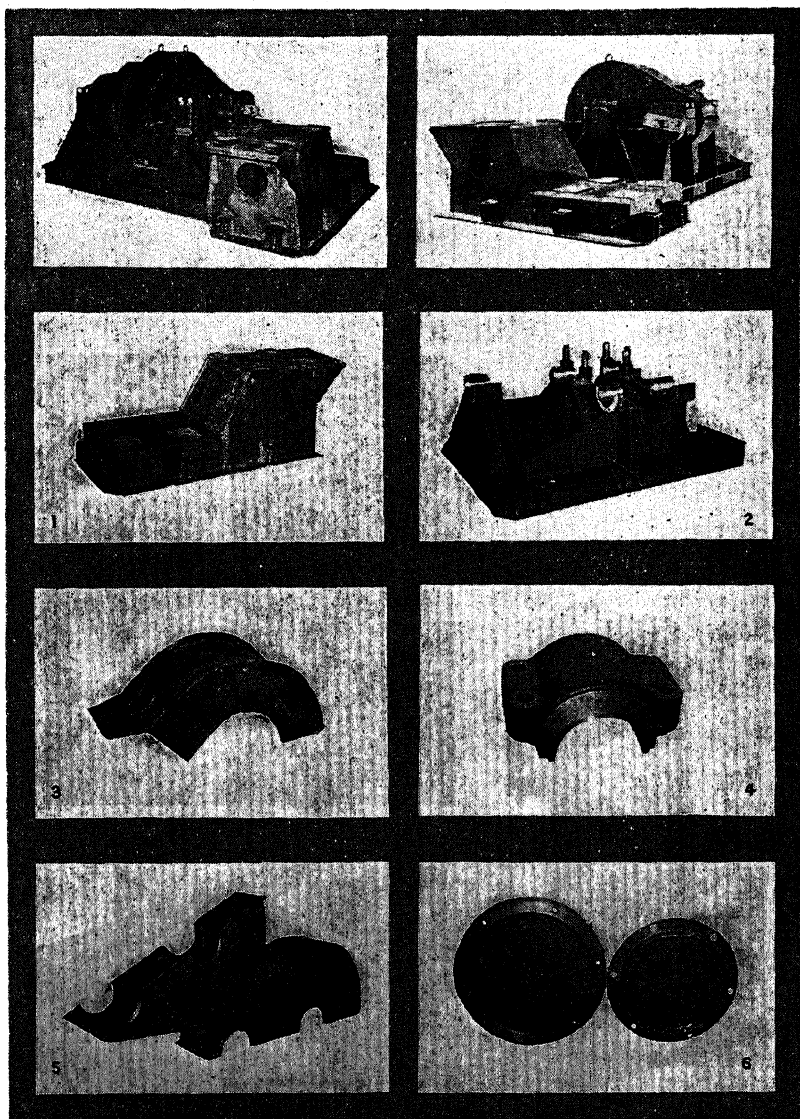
Above: Two views of a tilting mechanism for a 150-ton tilting open hearth furnace. At first glance this would appear to be a fairly complicated design. However, it is merely an assembly of simple parts. These parts are shown below. (1) Base for the drive. (2) Base for speed reducing and operating mechanism. (3) Cover for tilting gear. (4) Cast steel bearing cap. (5) Speed reducer covers. (6) Bearing cap covers.
